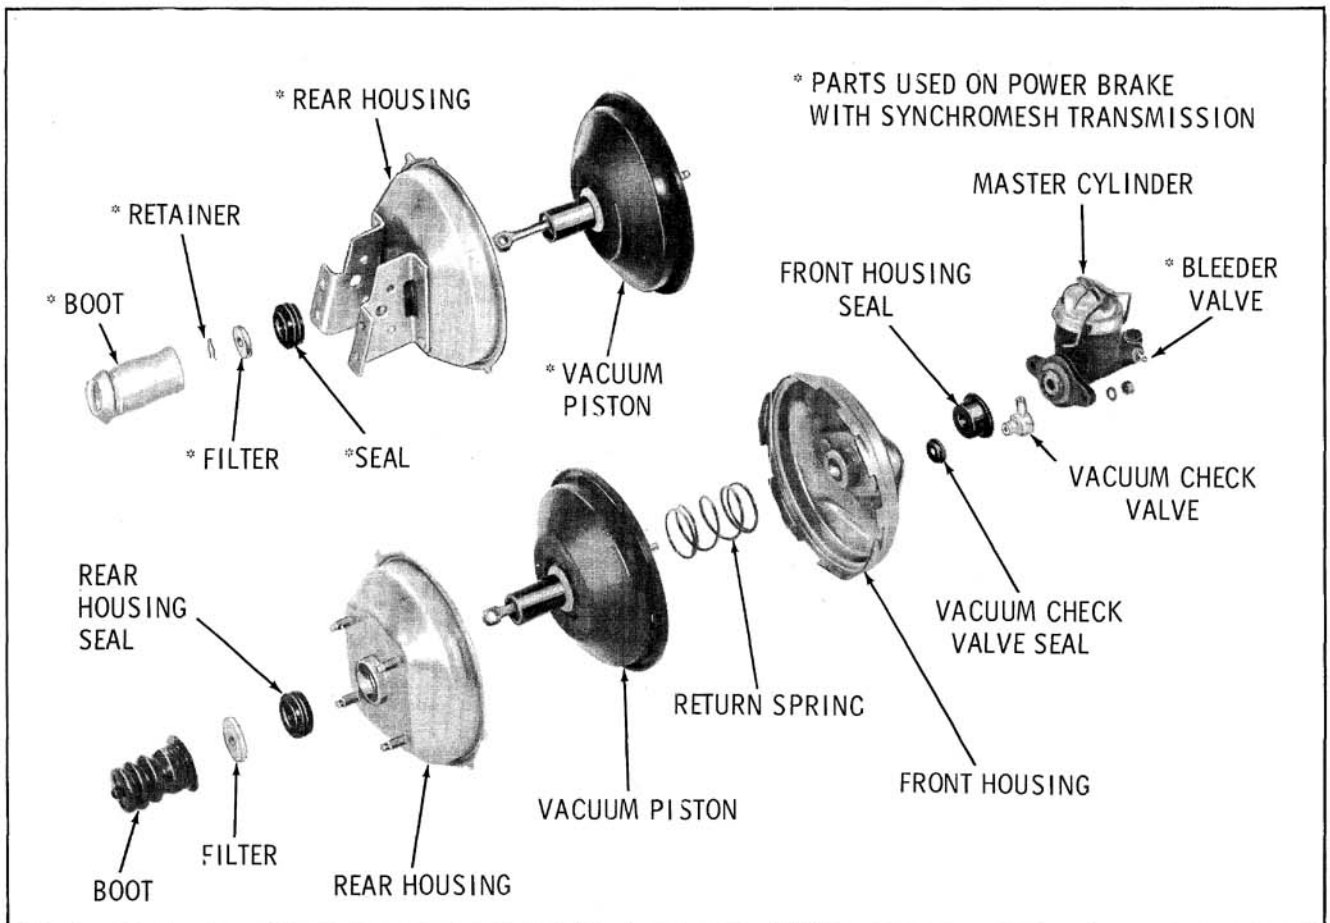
Moraine Power Brake Assembly (52 through 86 Series)
